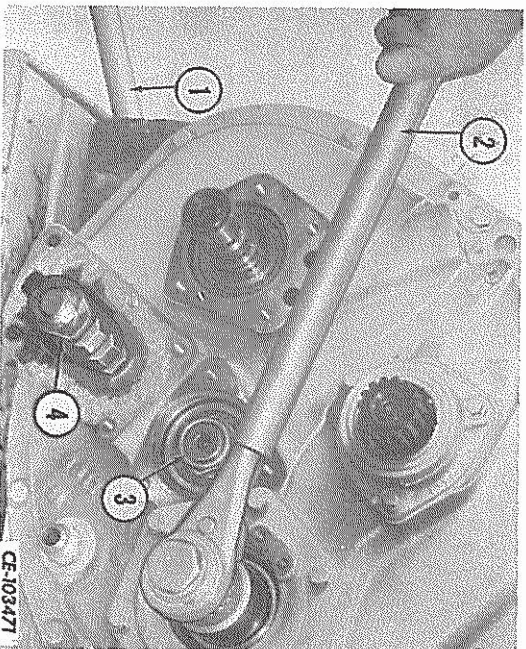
Removing the Bevel Pinion Shaft Front Nut
